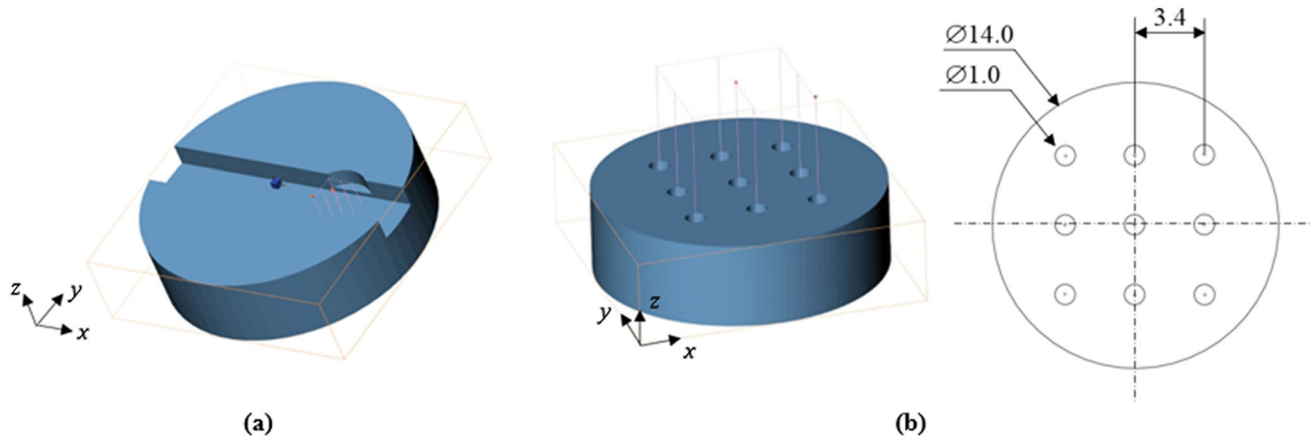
420 stainless steel samples machining: a aluminium support, and b machining design and strategy.
